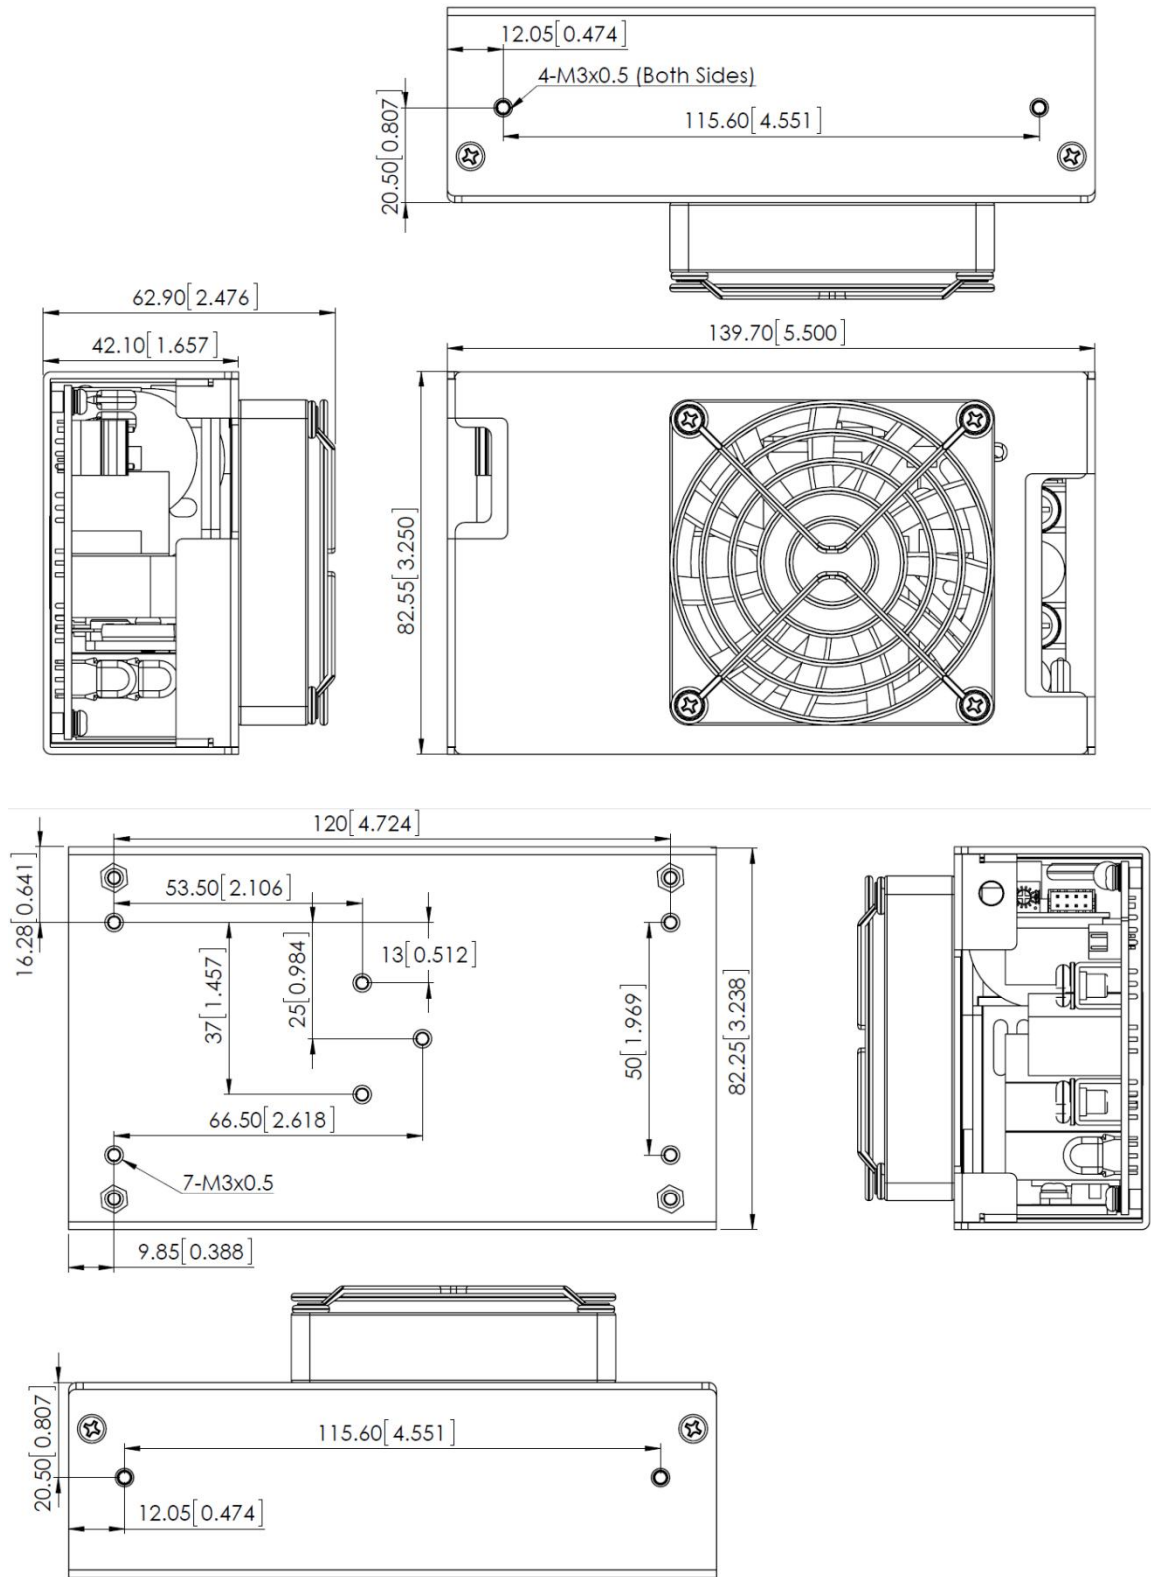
XLM500 Mounting Hole Locations and Dimensions
